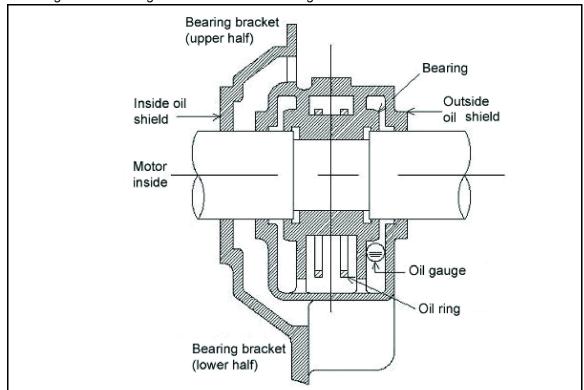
Oil Ring Lubricated Sleeve Bearings.
